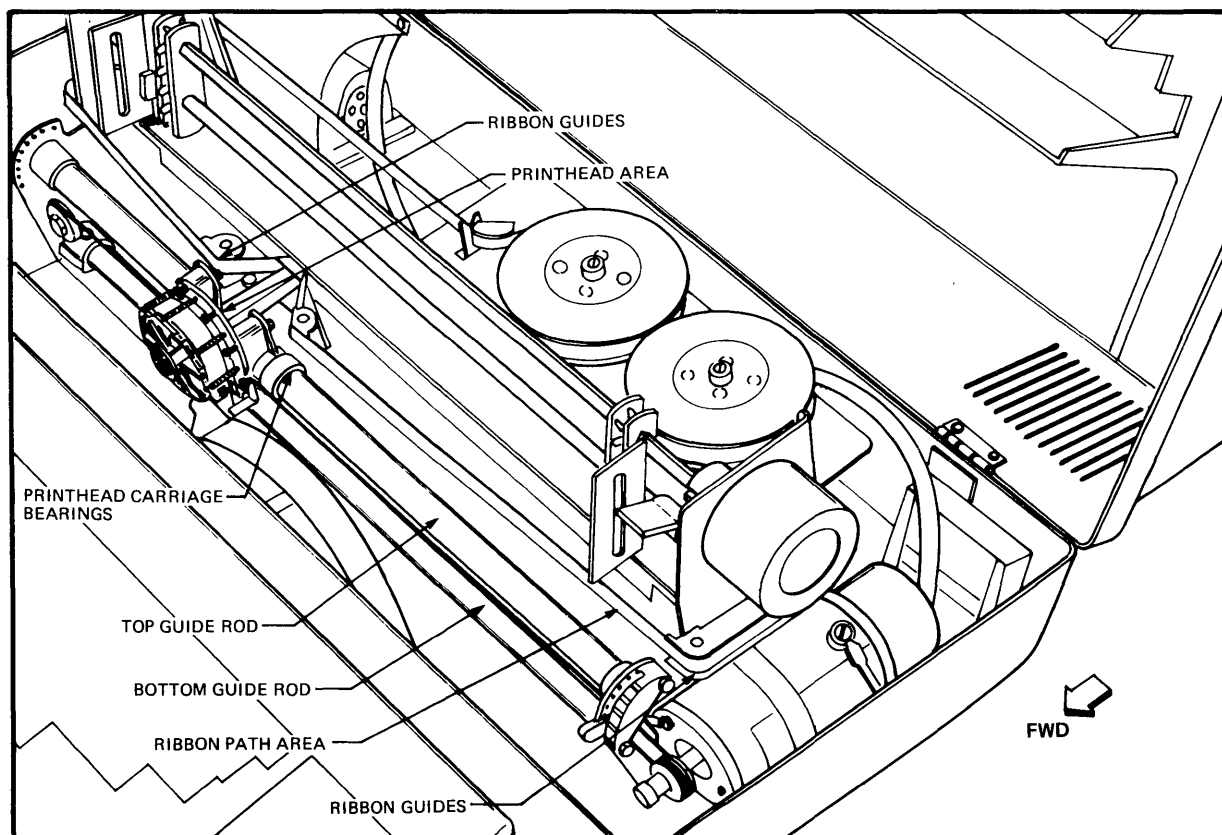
Printhead Area, Guide Rods, and Ribbon Guide
